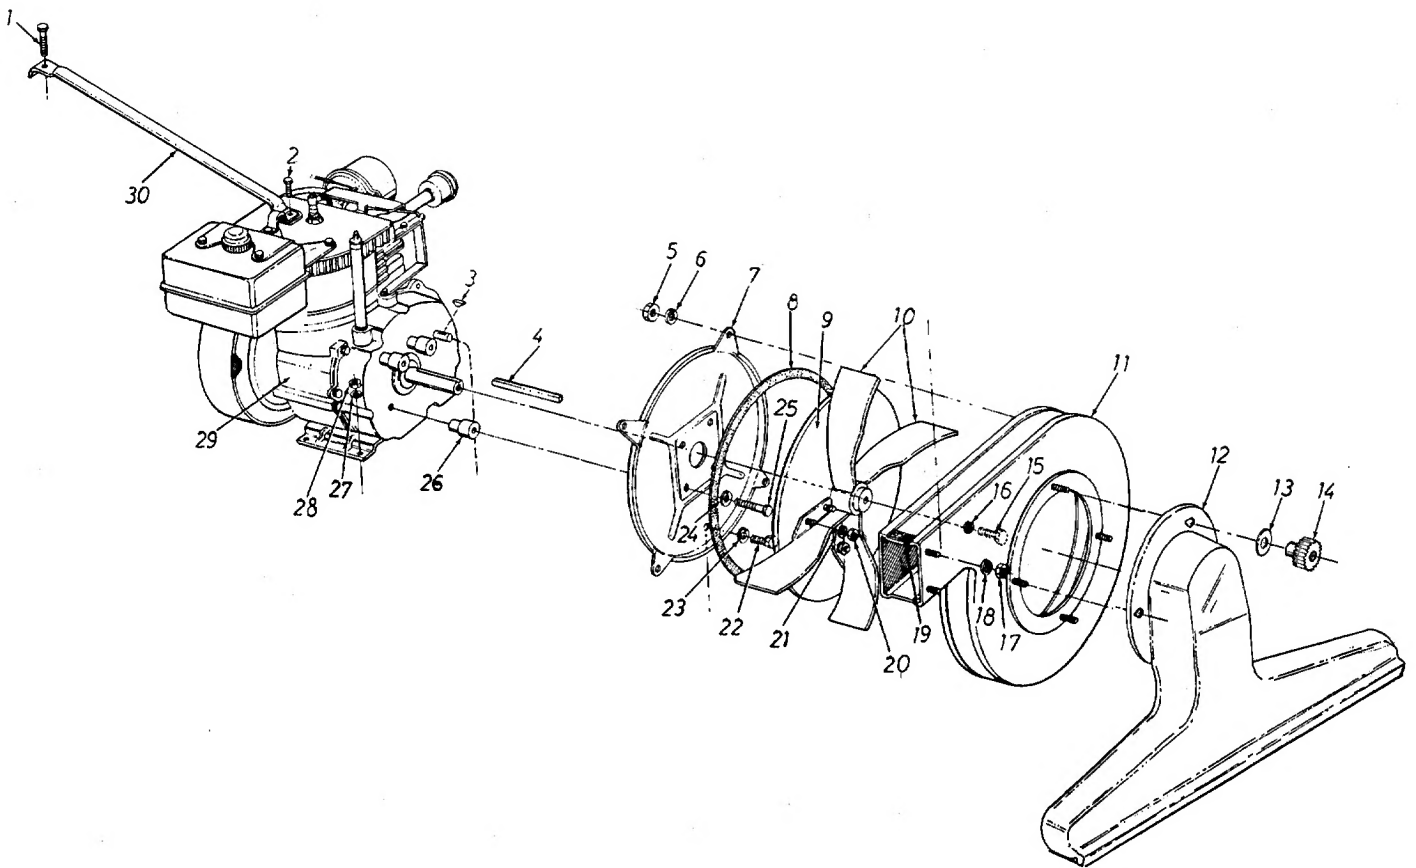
EXPLODED VIEW OF DRIVE ASSEMBLY
